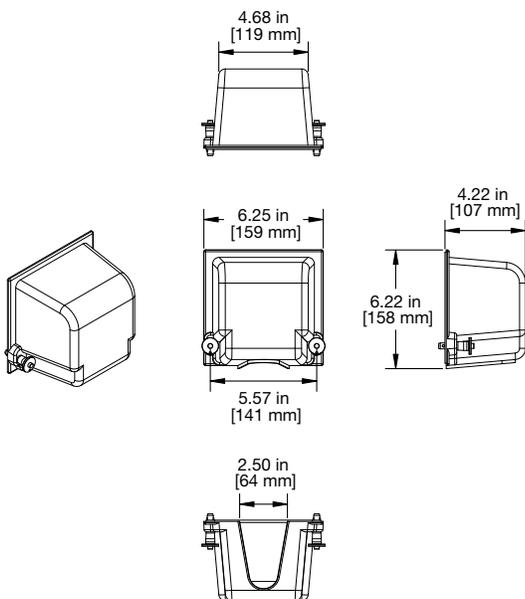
Vertical Rain Hood Dimensions: Lower Rain Hood Assembly
